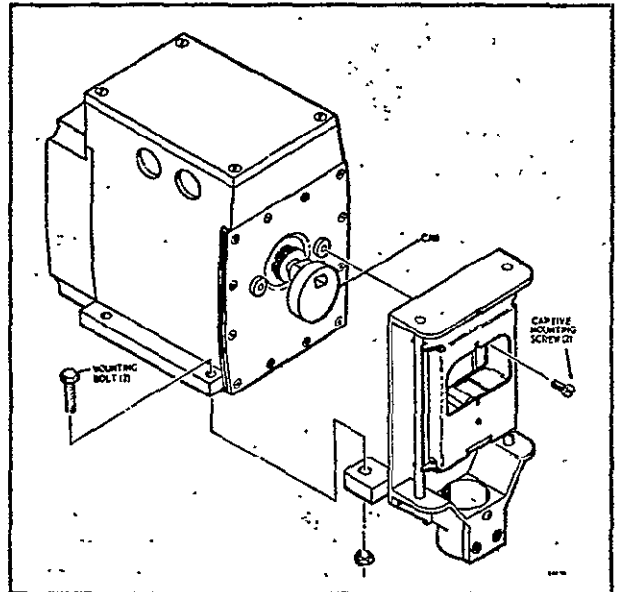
ASSEMBLY OF THE Q618 VALVE LINKAGE TO A MODUTROL MOTOR.
